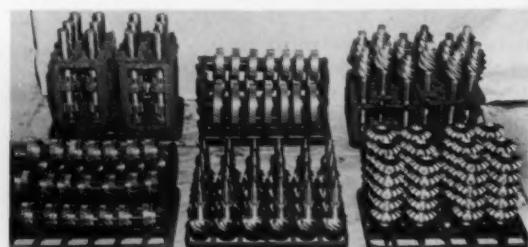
Typical loading of gears on fixtures, and fixtures on trays prior to gas carburizing. Fixtures and trays are made of HT cast high alloy.
